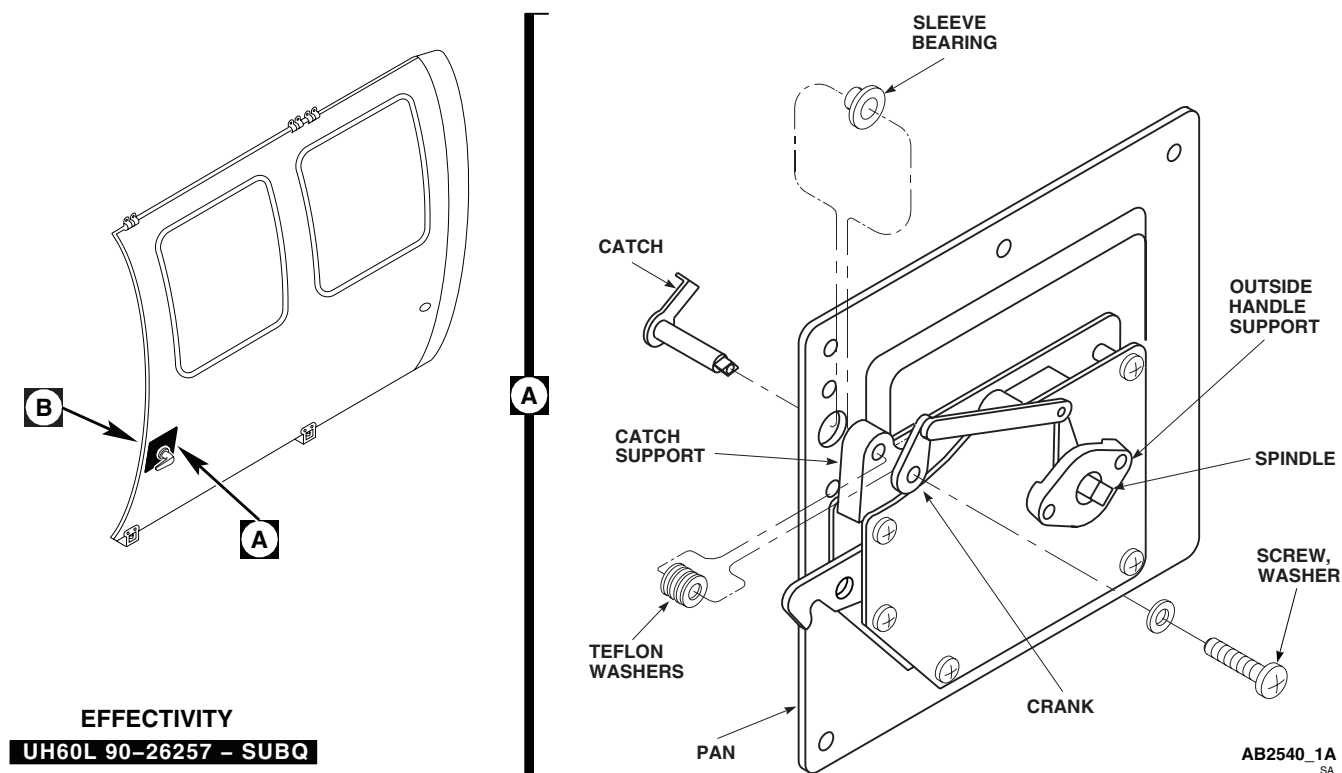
Replace Troop/Cargo Door Latch Assembly. (Sheet 1 of 7)
